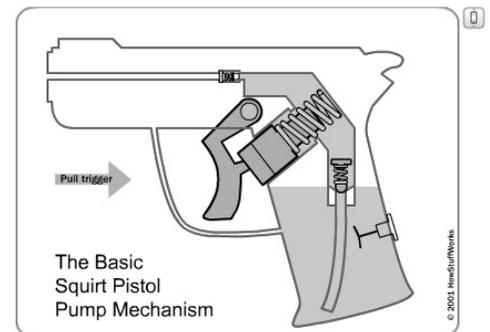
The Basic Squirt Pistol Pump Mechanism [2]
